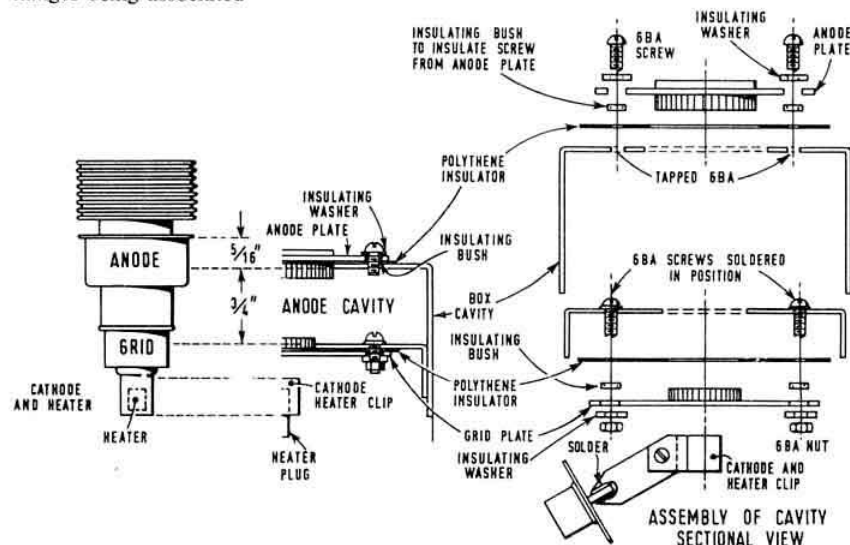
Assembly of cavity. The position of the valve is very important: it should be placed for maximum output, but this will affect the tuning. Should the tuning paddle not correct the tuning, the grid tray will need to be moved slightly.
